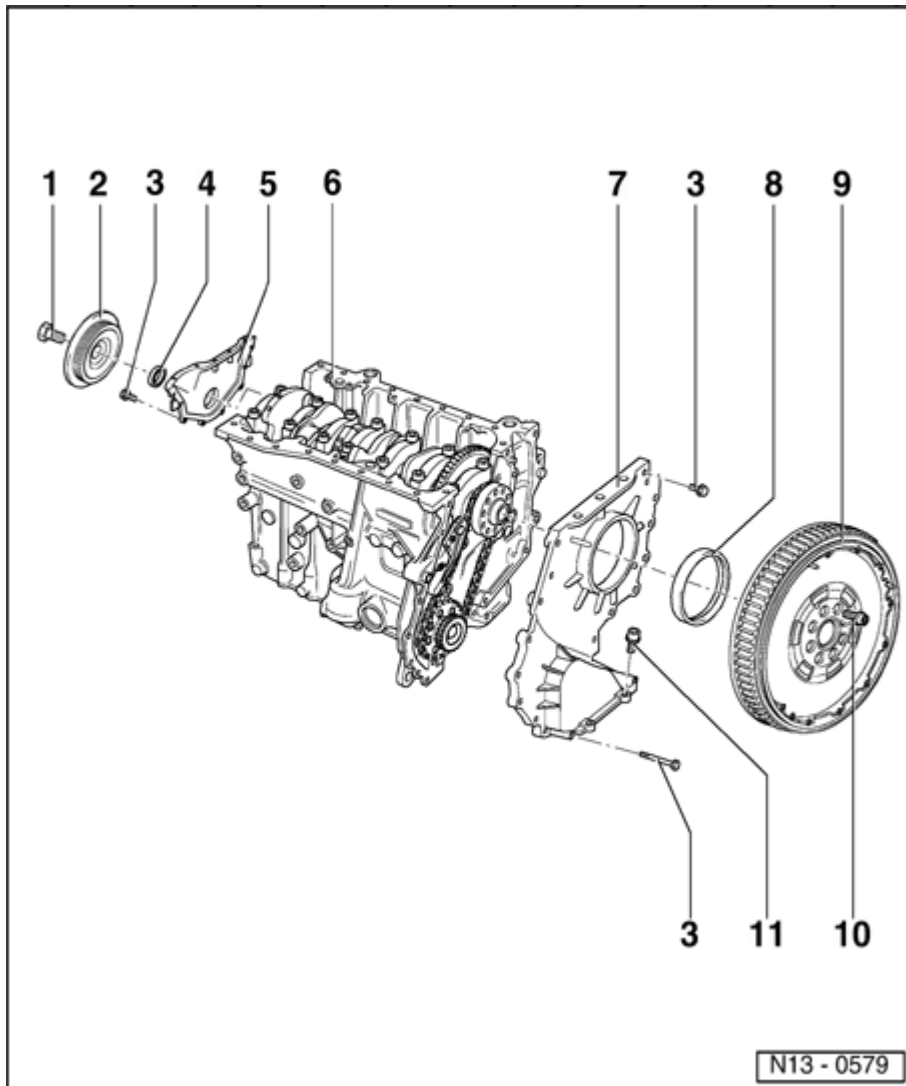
Sealing Flanges And Flywheel, Removing And Installing Remove/Install Components
